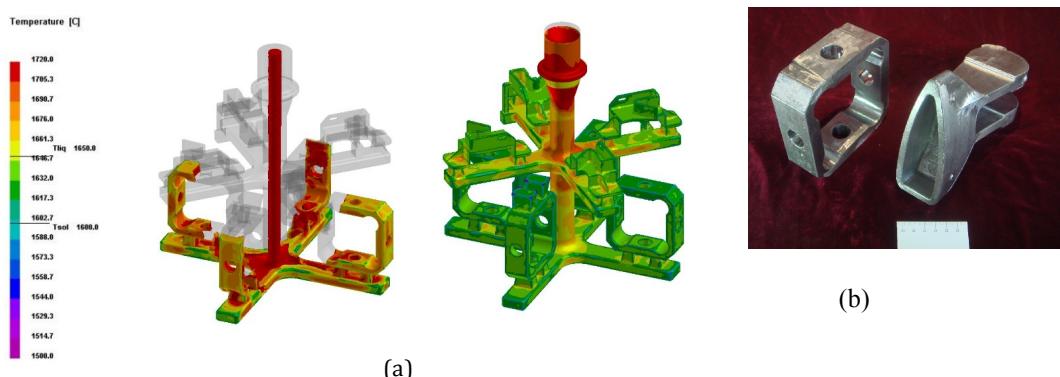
(a) showing modelling of filling and (b) the actual castings produced of the gimbal and frame connector after cleaning up the castings.
